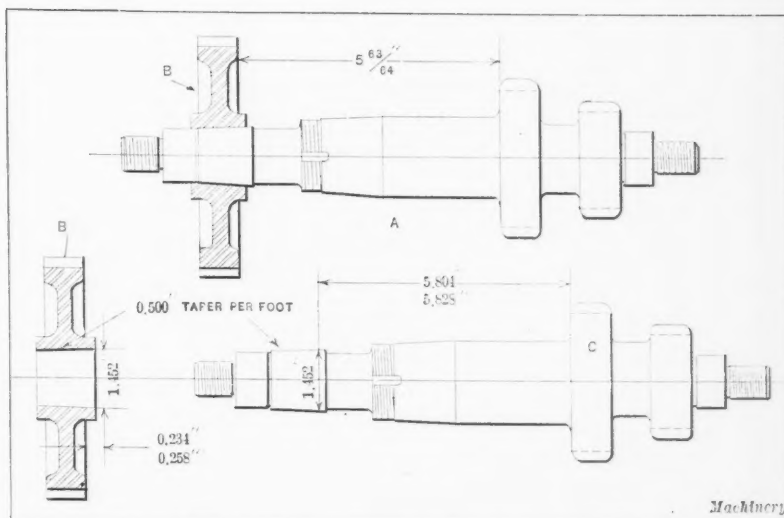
Another Example of the Application of the Taper Dimensioning Method when the Assembled Part does not come in Contact with a Shoulder
